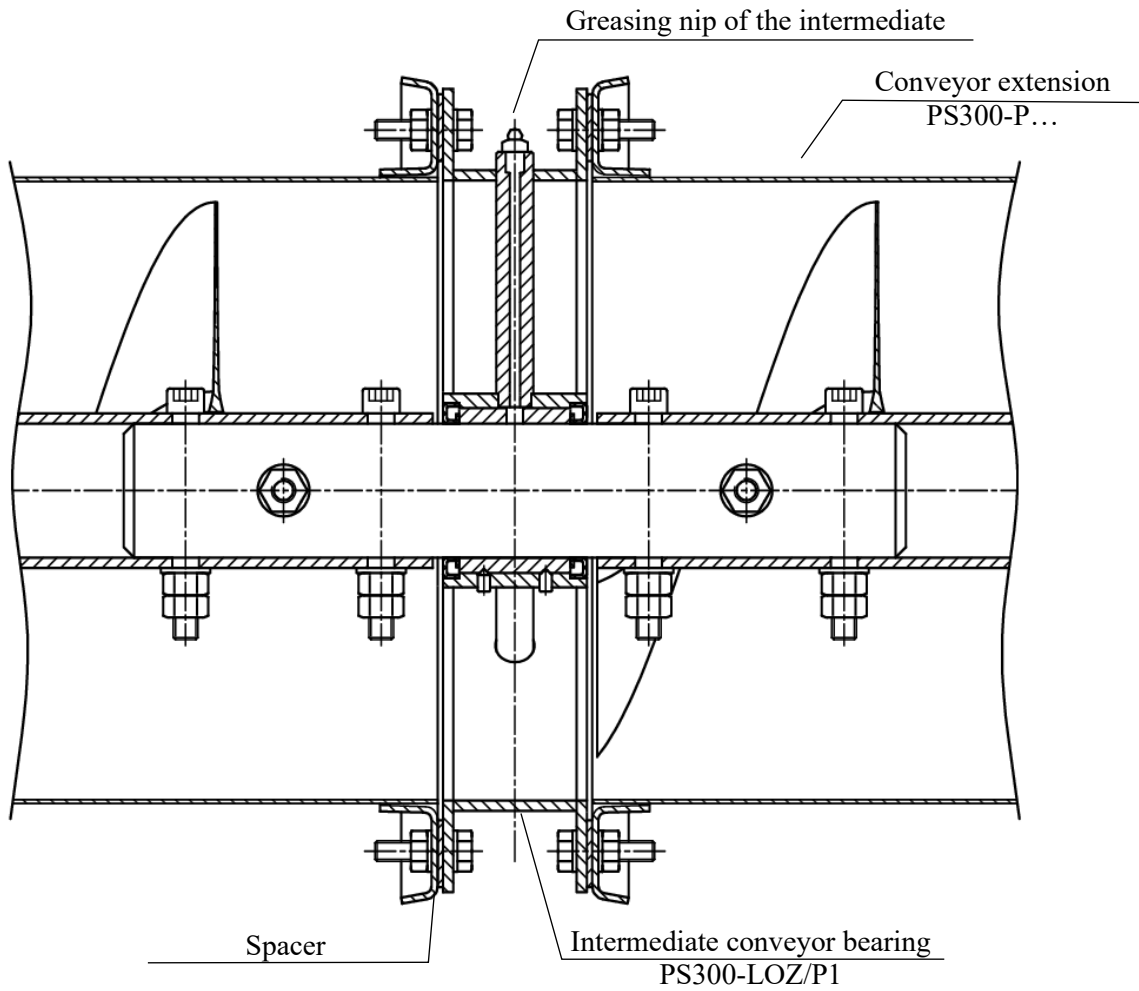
Connection of the intermediate bearing of the PS300-LOZ/P1 conveyor to extensions of the PS300-P... conveyor
